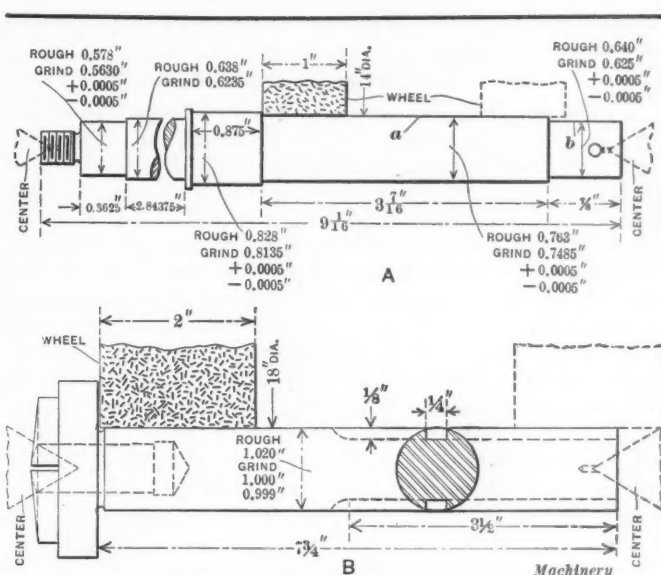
Examples illustrating "Step-in" Method of grinding Cylindrical Work
